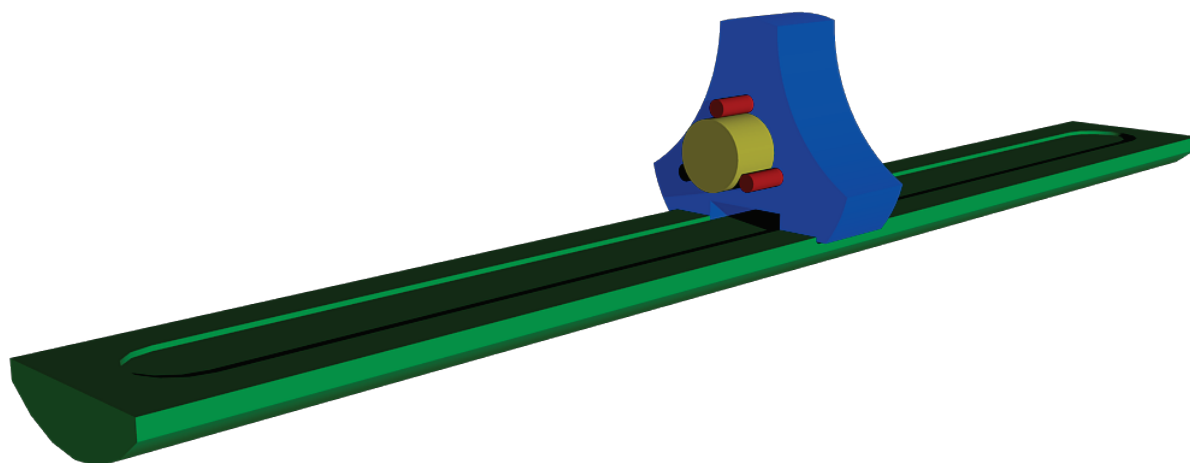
Target and sample assembly: target (yellow) held by three alumina pins (red), force-assembled in the target holder (blue), carried by the sample tray (green).
